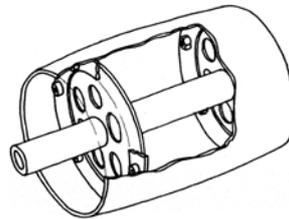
A cut-away illustration (Tjalve *et al.* 1979b)
